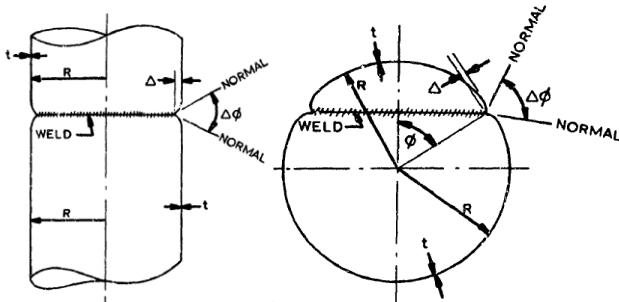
Typical weld sinkage in cylinder and sphere[9]
